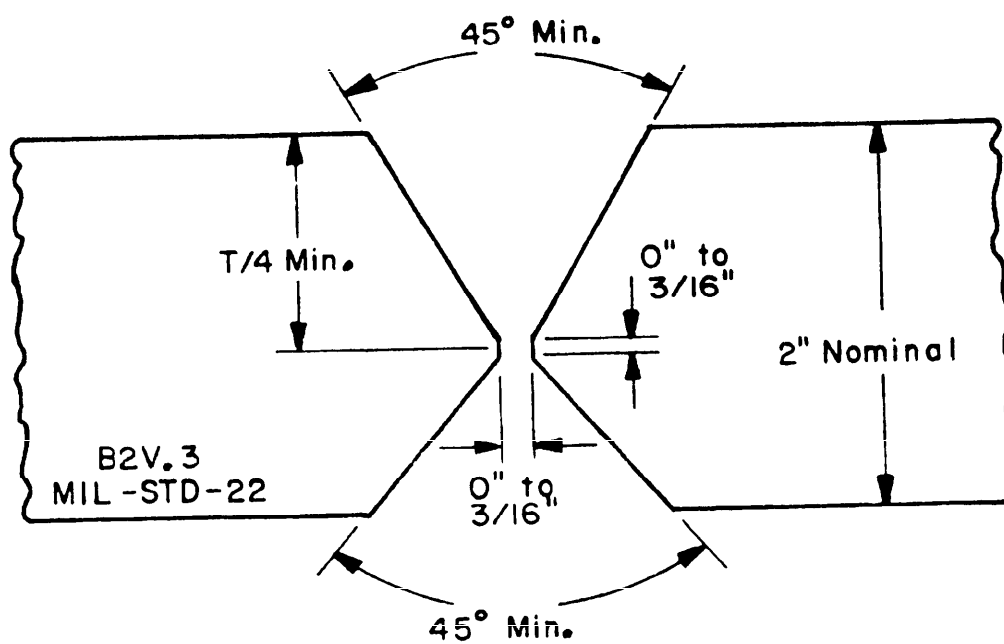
Typical joint configurations for explosion test weldments.
